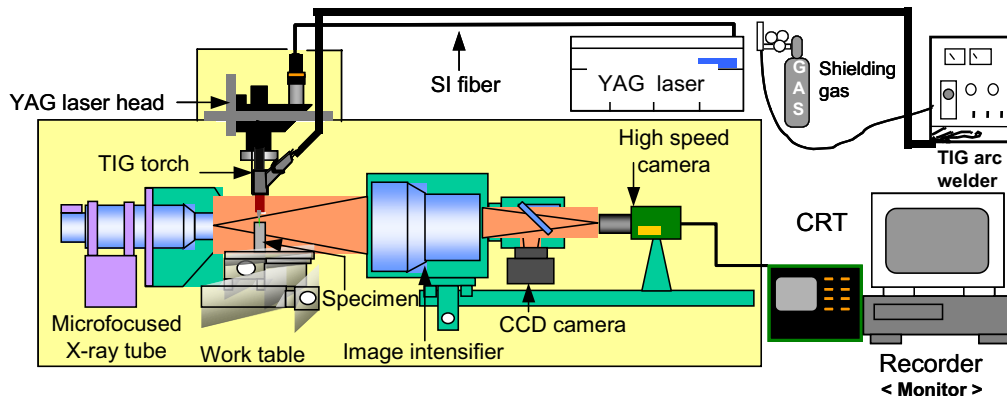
Schematic arrangement of X-ray transmission imaging system for observation of phenomena inside molten pool during hybrid welding.
